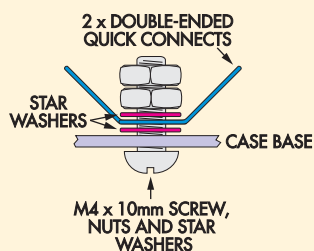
the Altronics case will come with the main earth lugs mounted in place. However, if you're using a different enclosure, here's how to install the chassis earth point. Two nuts are used to permanently lock the assembly in place. Make sure that it forms a sound electrical contact with the chassis.
